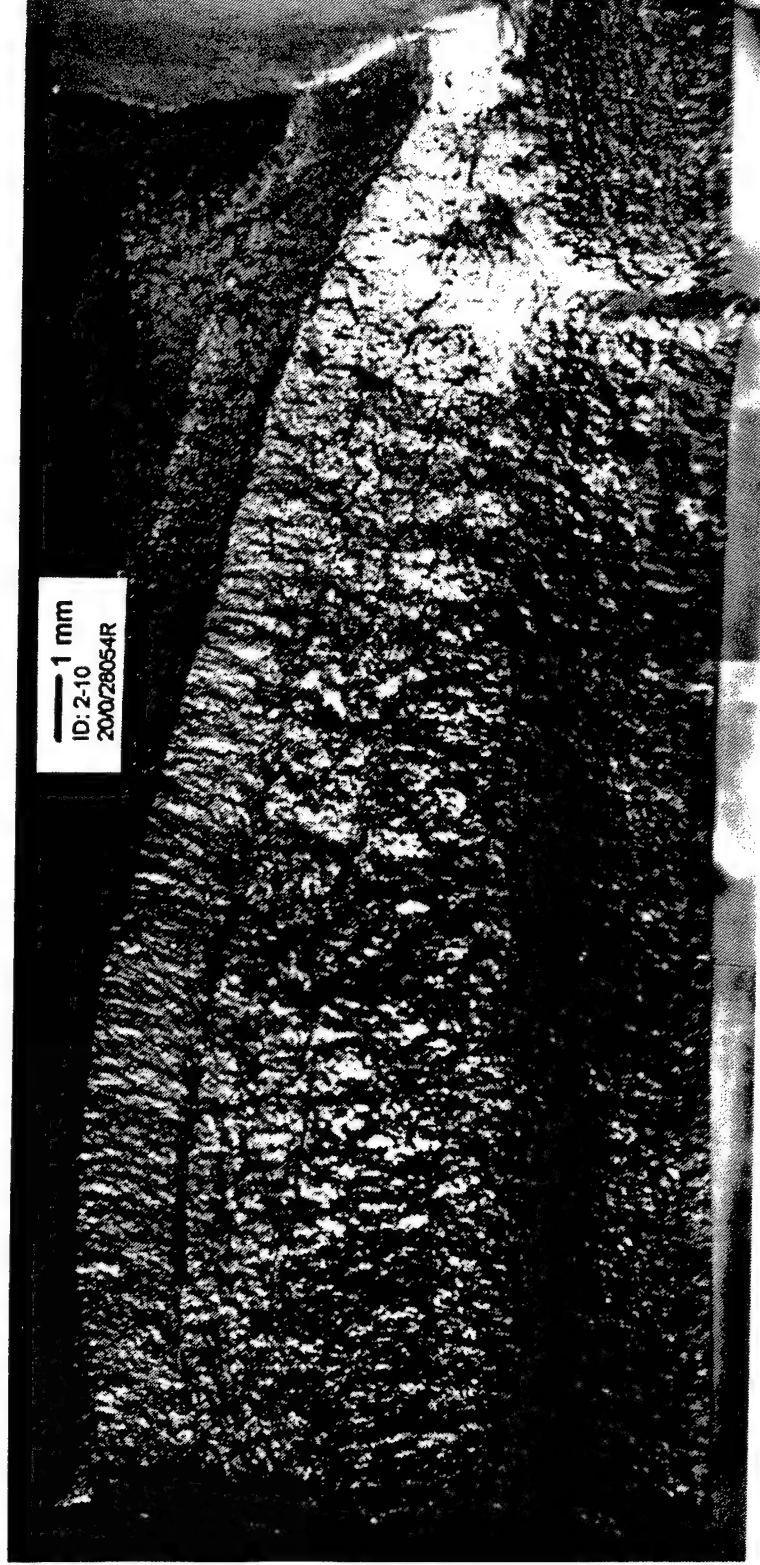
Fatigue fracture surface of the HSLA-80 but weld sample subjected to random loading:
